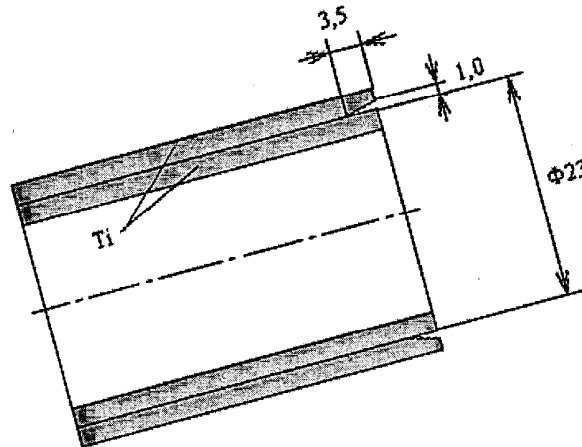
Welding of samples (titanium tubes) geometry.
